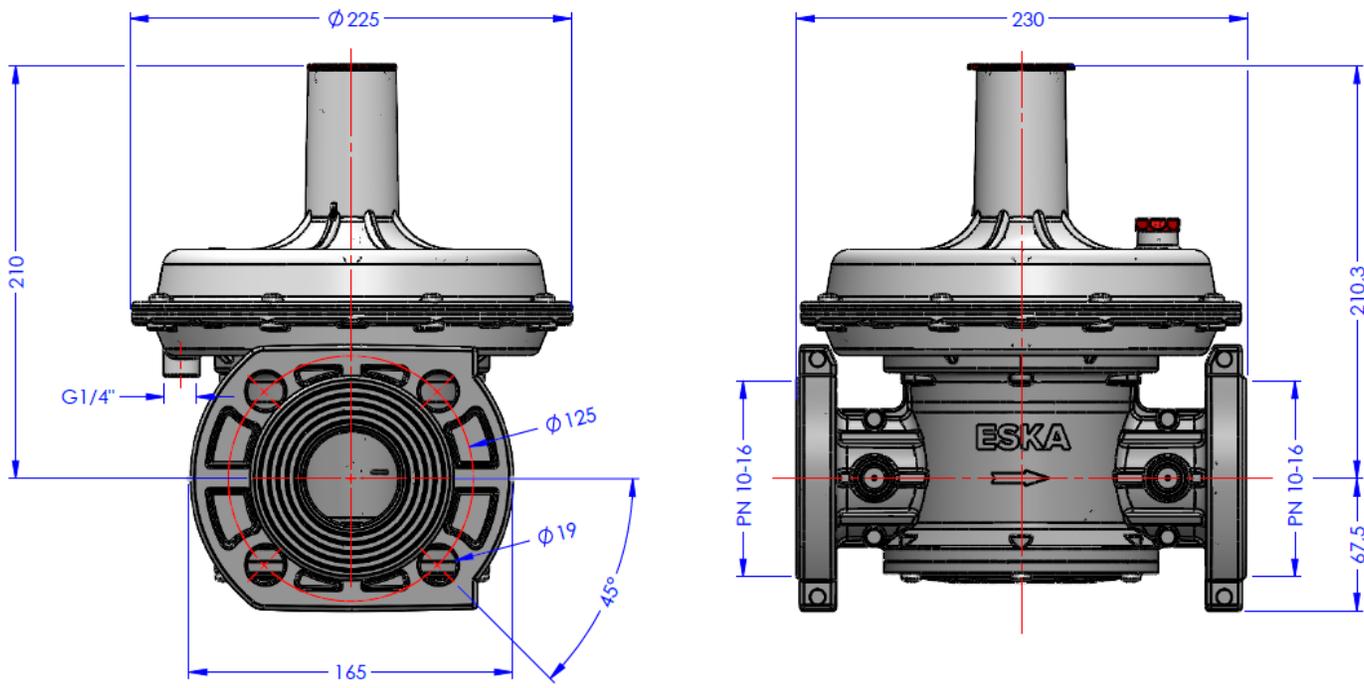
ERG-H DN50 Flanged Technical Dimensions
